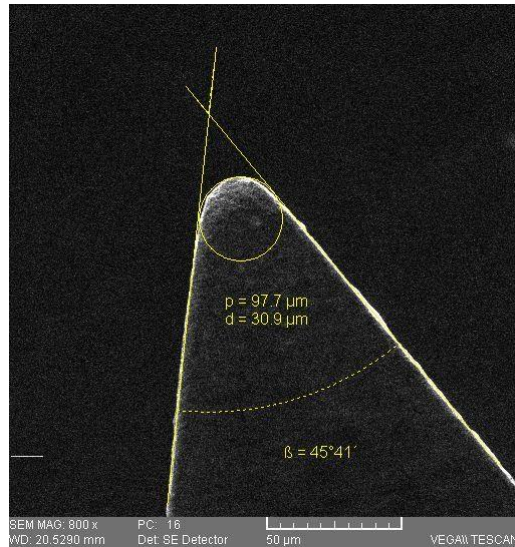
Special carbide insert dimensions: flank angle =  $45^{\circ}41'$ , radius =  $15.45 \mu\text{m}$
